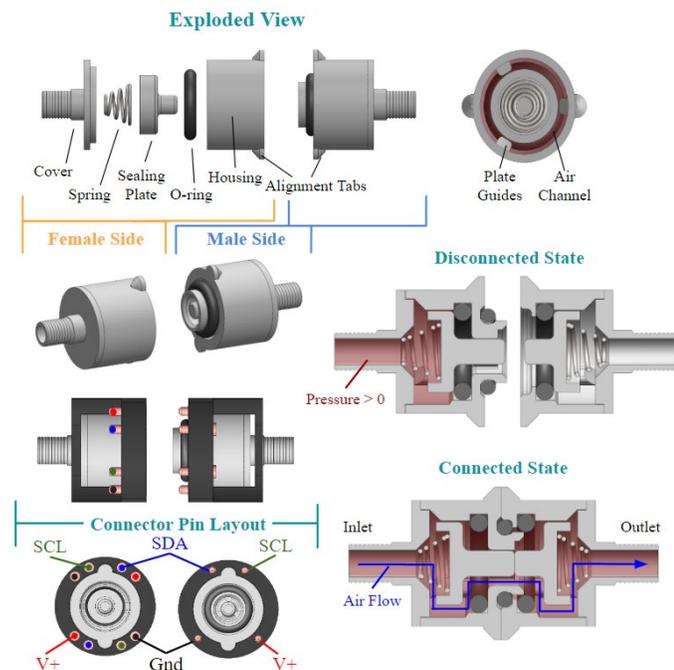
PAC connector valve design. Exploded view shows the internal 3D printed components, spring, and O-ring used for sealing the connection. The pin layout is arranged in a way that allows two orientations of connection. The cross-section views show the valve in disconnected and connected states. The sealing plate is pressed against the O-ring until connection is made and the sealing plates are pushed in.
